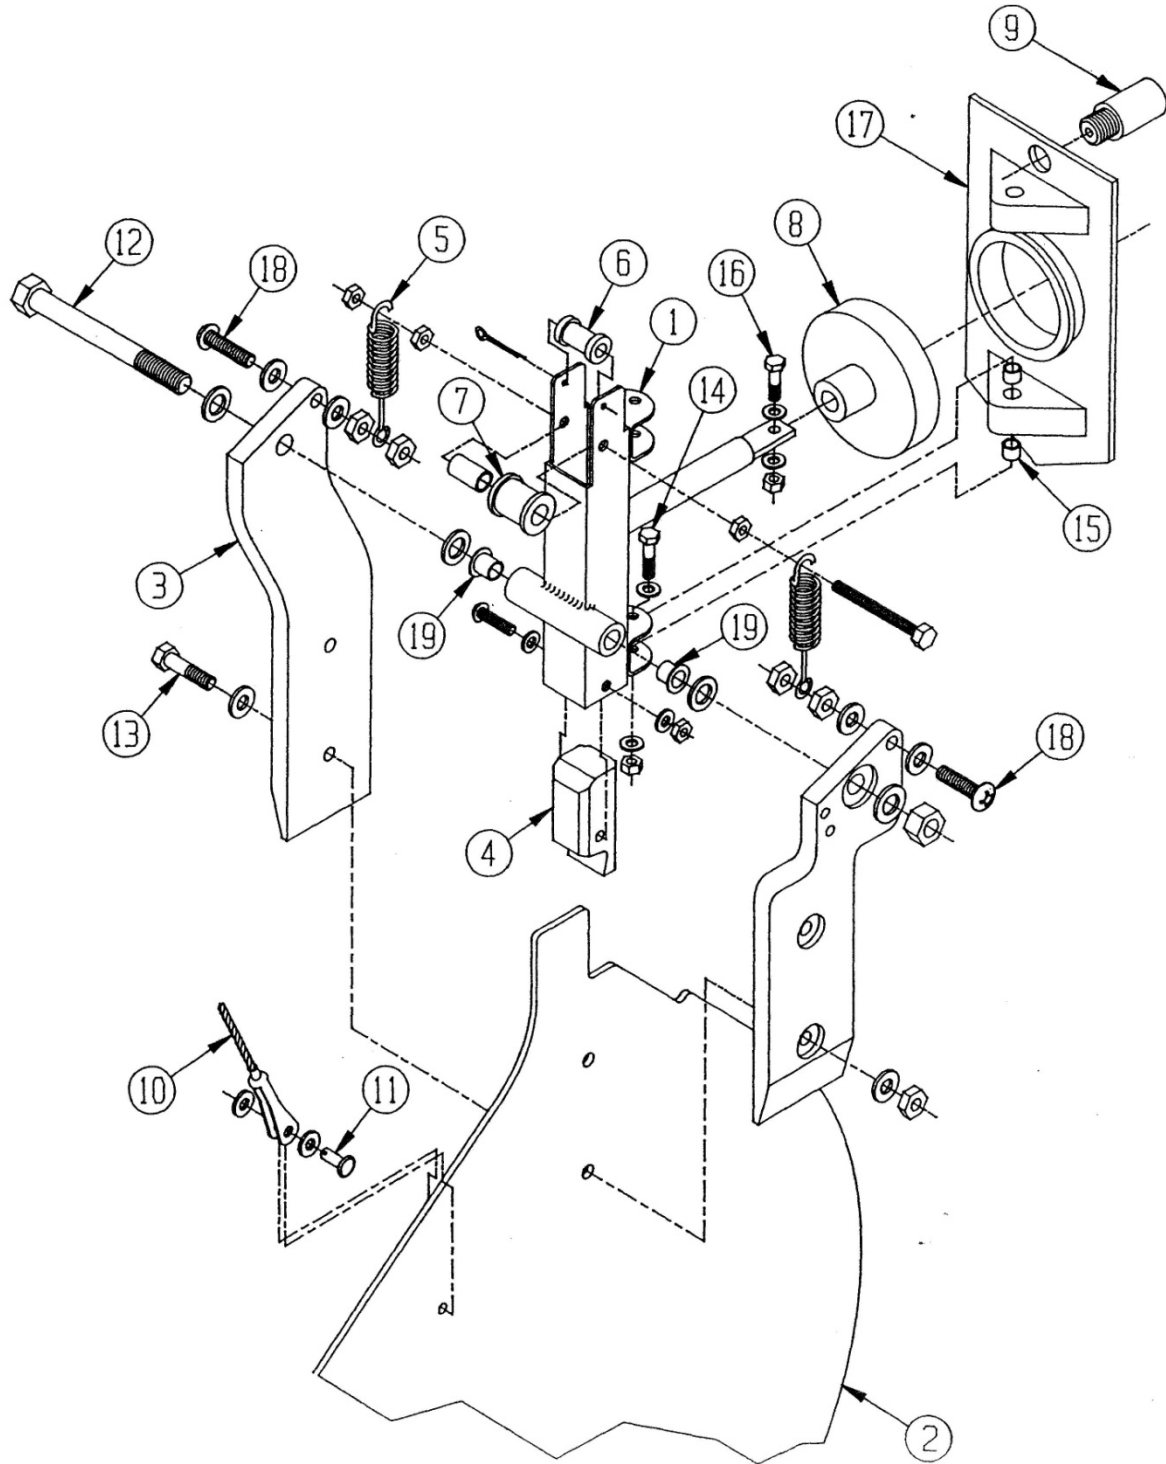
NOSE GEAR RETRACTION ASS'Y-UPR. END (O-RINGS)
